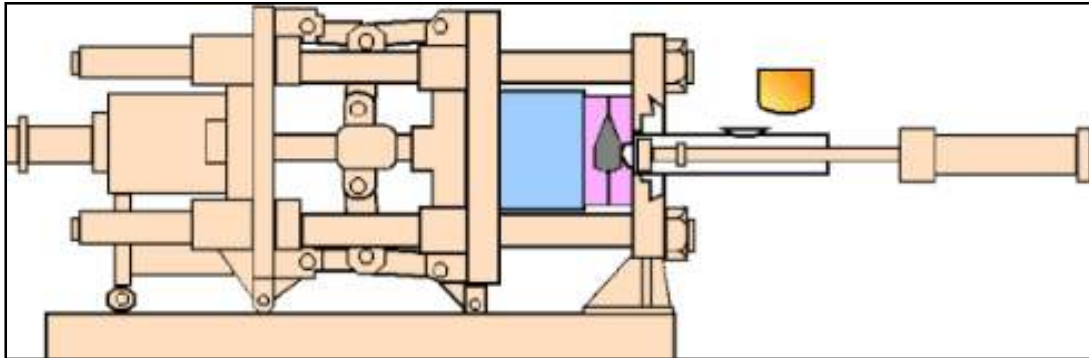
Scheme of a cold-chamber HPDC machine [17]
